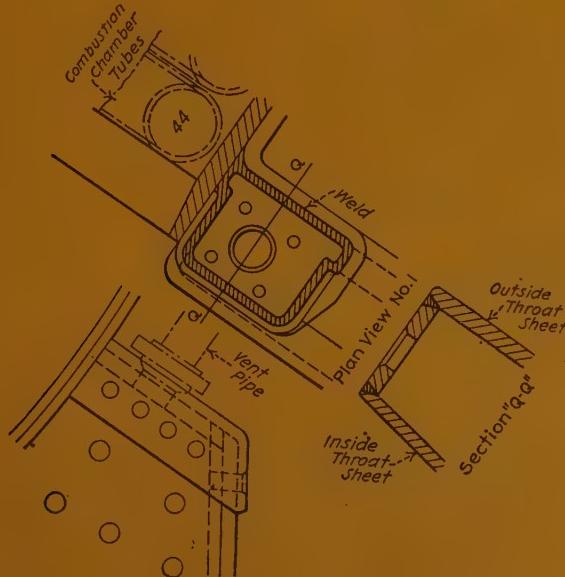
Method of closing throat sheet corners. A plate is first welded in the opening, the lap of the sheets at the end of the throat is smoothed by welding and scarfing and the flanged cap fitted in place hot, after which it is secured by screw rivets and welded to the dry shell and to the inside plate at the edges of the vent opening. The opening is then reamed and the studs applied.
